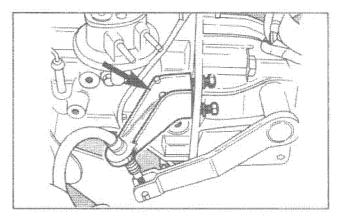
Engine removal - clutch cable bracket - 847 engine
